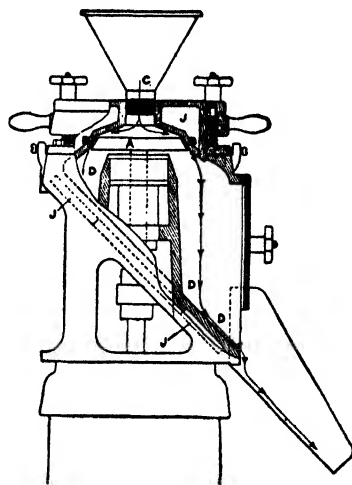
Cross Section of Paste Type Colloid Mill. (Courtesy Premier Mill Corp.)
